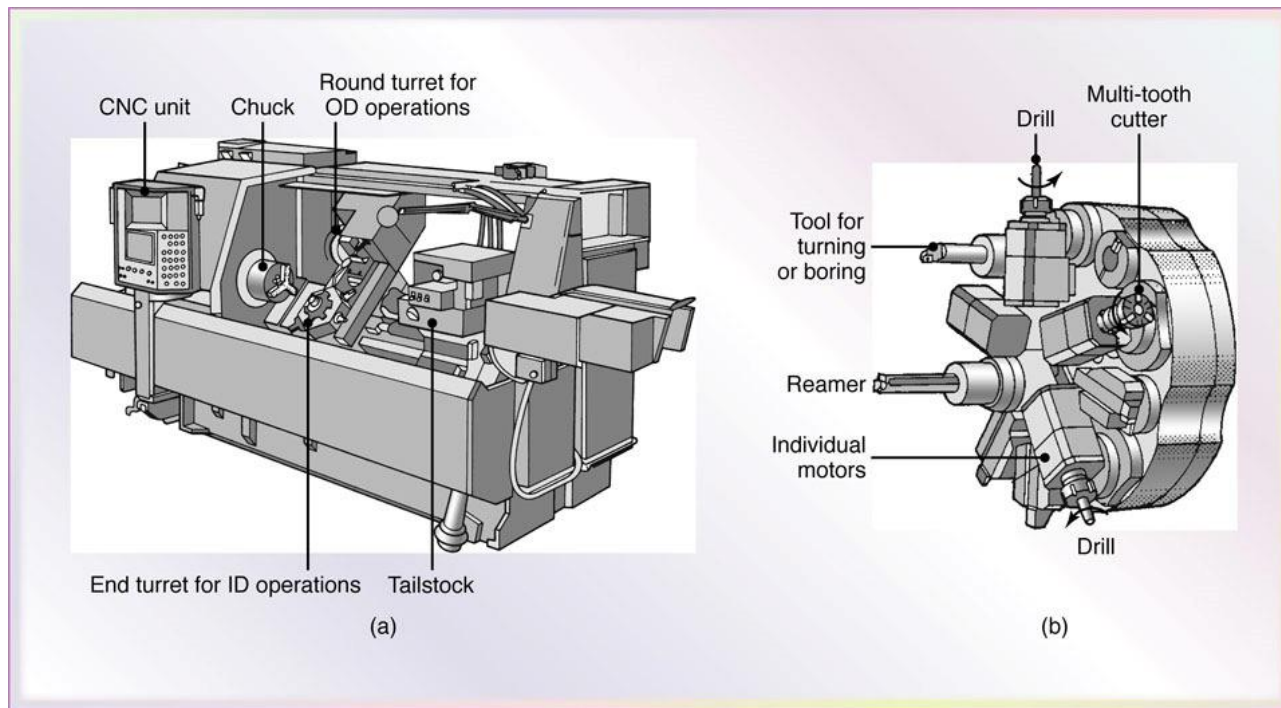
(a) A computer numerical-control lathe. Note the two turrets on this machine. These machines have higher power and spindle speed than other lathes in order to take advantage of new cutting tools with enhanced properties. (b) A typical turret equipped with ten tools, some of which are powered.
